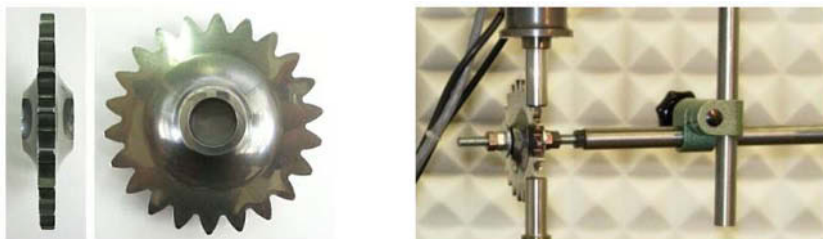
A photo of one of the tested gears FIGURE 2. Experimental installation
